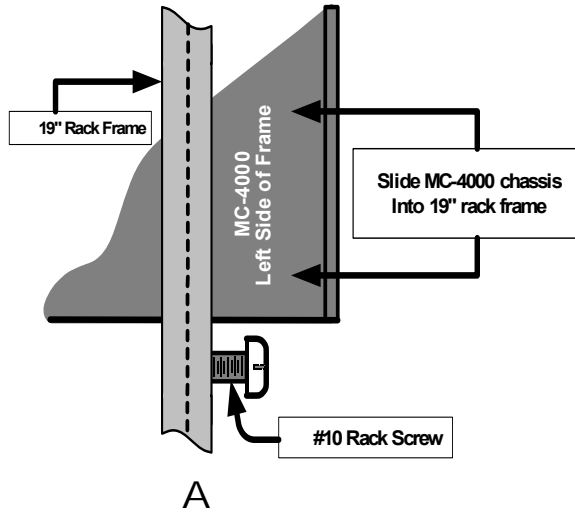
Sliding the MC-4000 chassis into the rack frame
